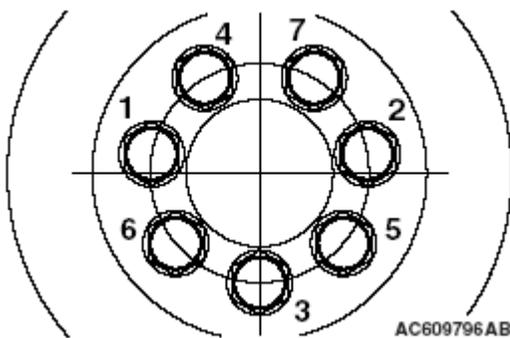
Identifying Drive Plate Bolts Tighten Sequence
